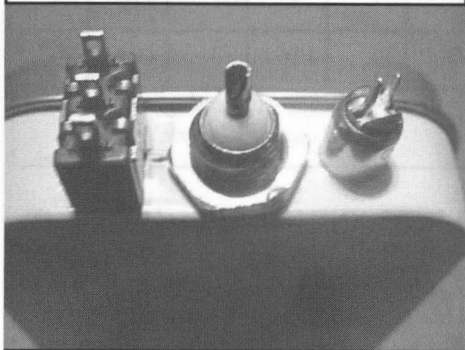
Do a test fit by putting the parts on the outside to make sure everything fits reasonably well.
